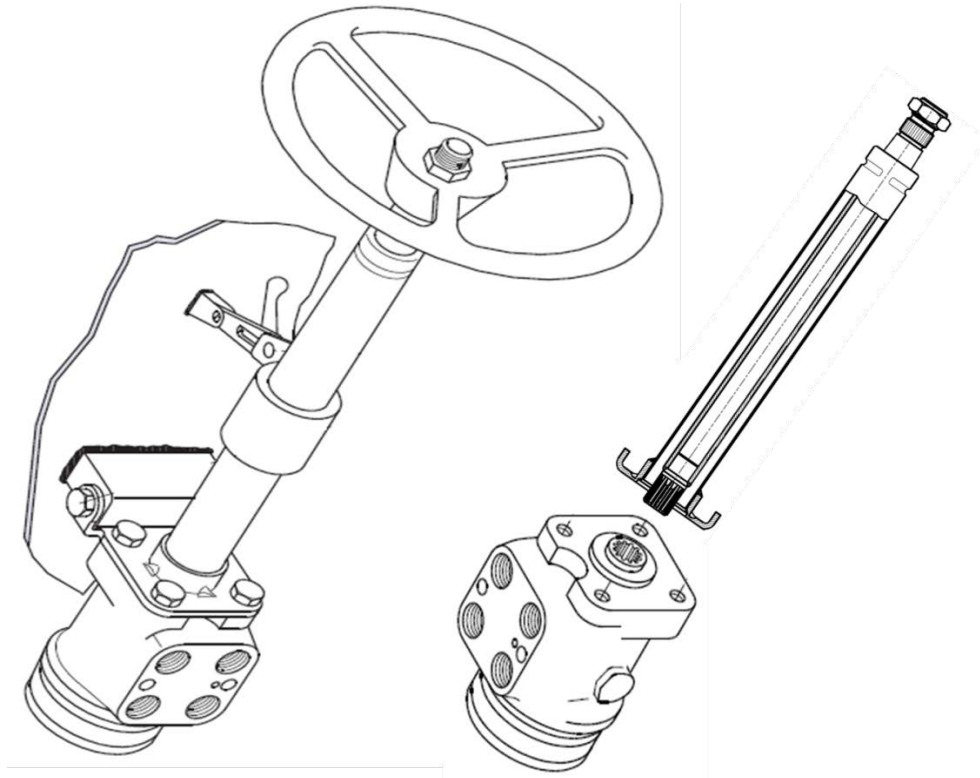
Stock Steering Column Assembly and Steering Valve (Courtesy: Danfoss Power Solutions).
